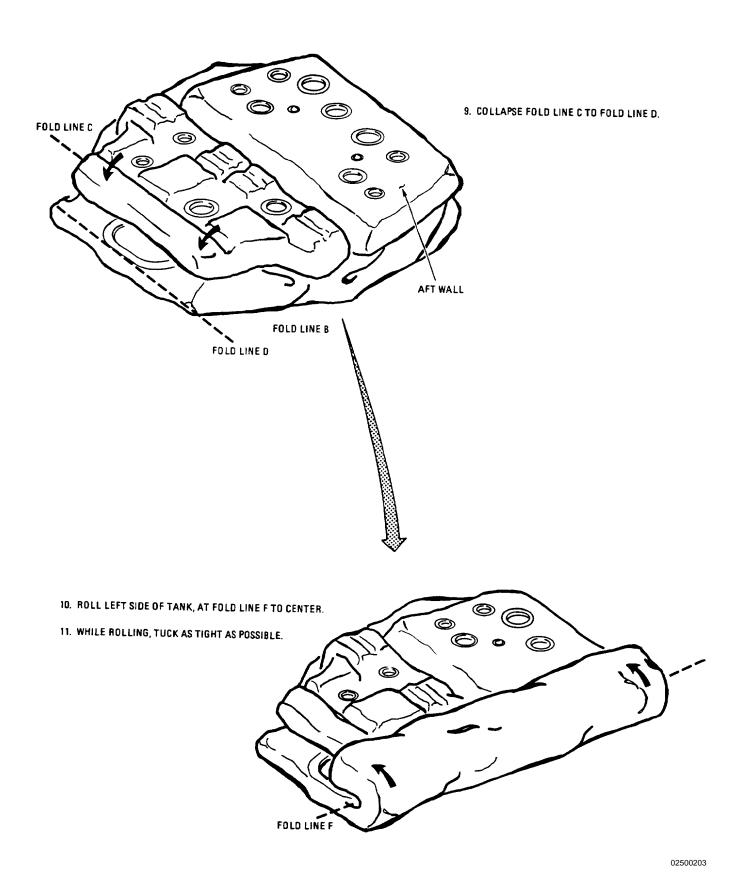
Installation - No. 3 Fuel Tank Folding (Sheet 3)
